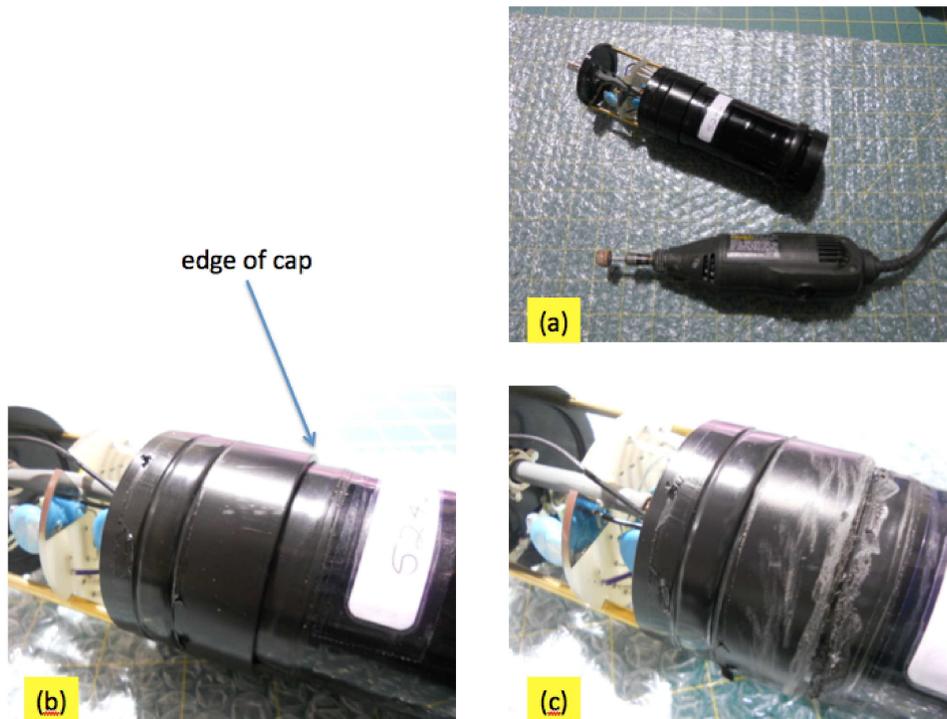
(a),(b) Photographs of a PMT/divider assembly before modifications. (b) shows the offending face of the PMT plastic endcap that conflicted with the lip of the *inner shield*. (c) shows the plastic endcap after machining with the Dremel tool setup shown in (a).
